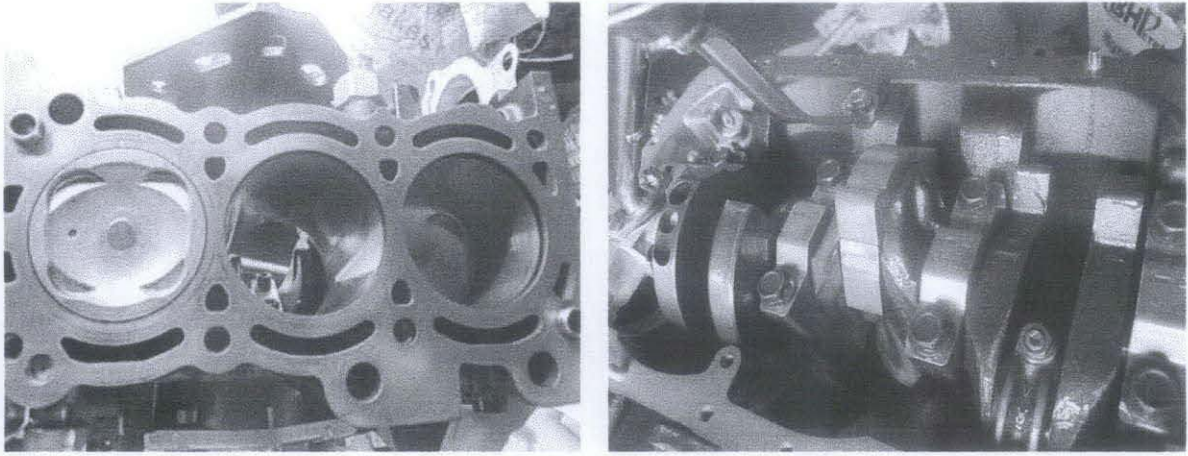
shows the balancer on the crankshaft and removed piston assembly in the middle
